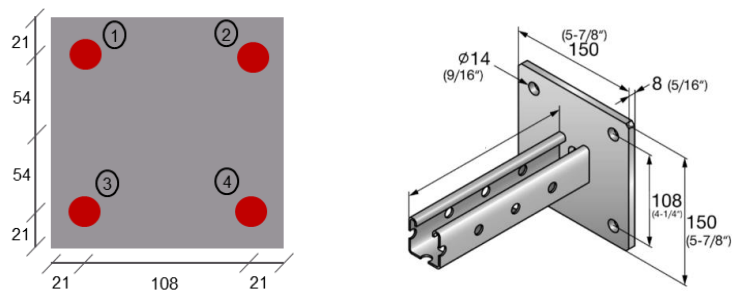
Example of the geometry of a cantilever Typical (dimension in mm).
